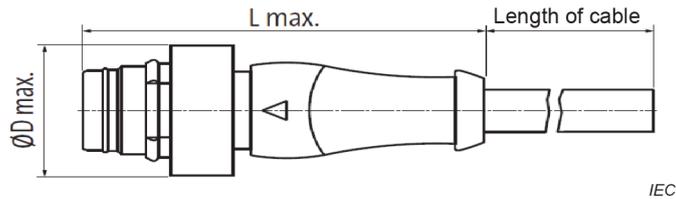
Non-rewireable connector, male contacts, straight version, with inner push-pull locking
